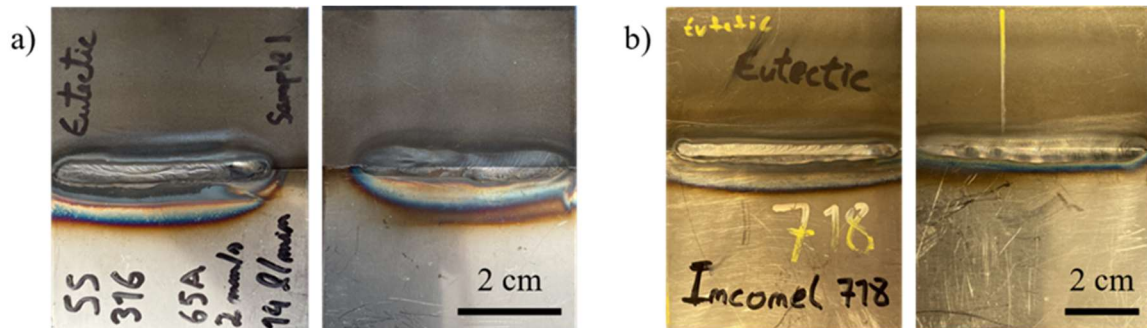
Final Dissimilar welded joints: a) AlCoCrFeNi_{2.1} EHEA / 316 stainless steel, b) AlCoCrFeNi_{2.1} EHEA / Inconel 718
